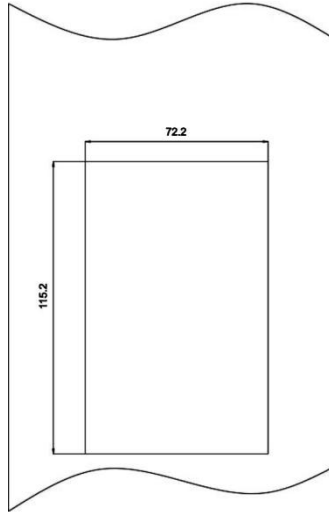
Dimensions of opening holes on the operation panel (keypad)
